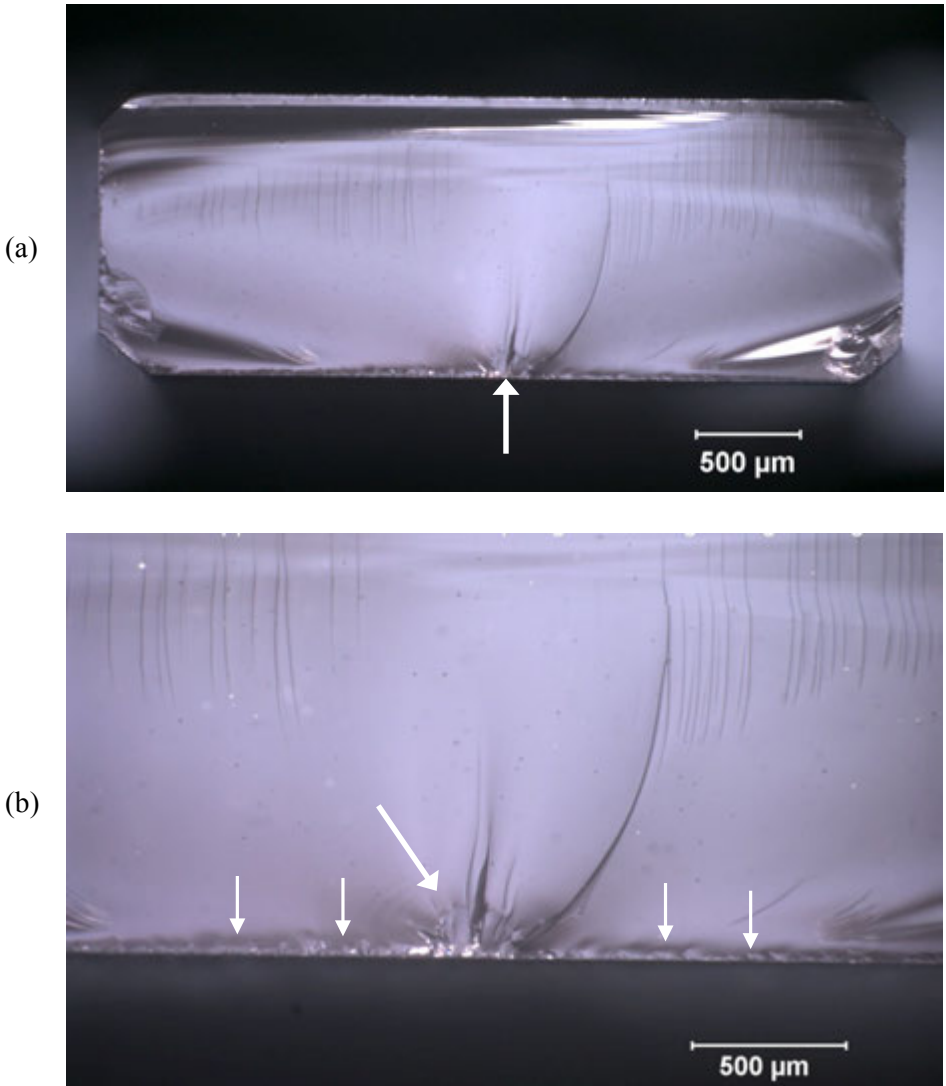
Relatively smooth fracture surface (a) of a surface crack in flexure (SCF) sapphire test specimen with a 49 N Knoop indentation as a starter flaw (large arrow). The bar tensile surface was the a-plane. Fracture occurred on the m-plane. (b) is a close-up which shows grinding cracks along the surface (small white arrows), but the indentation crack (large white arrow) was dominant. The long curved line leading from the origin to the upper right is a “cleavage step hackle” line. (courtesy R. Krause).
